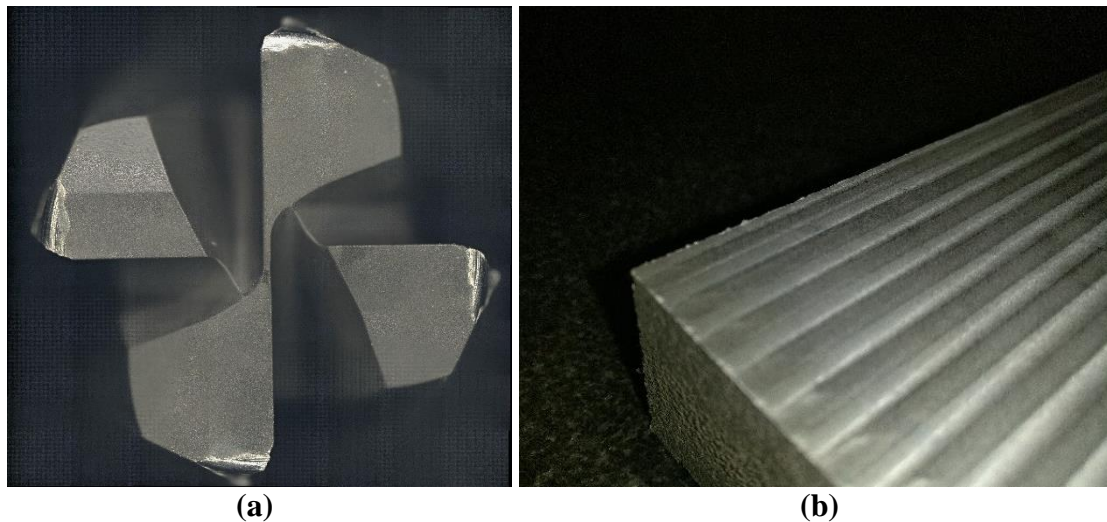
(a) CVD diamond coated end mill tool damage (b) AlSiC_p burr formation after endurance test.
